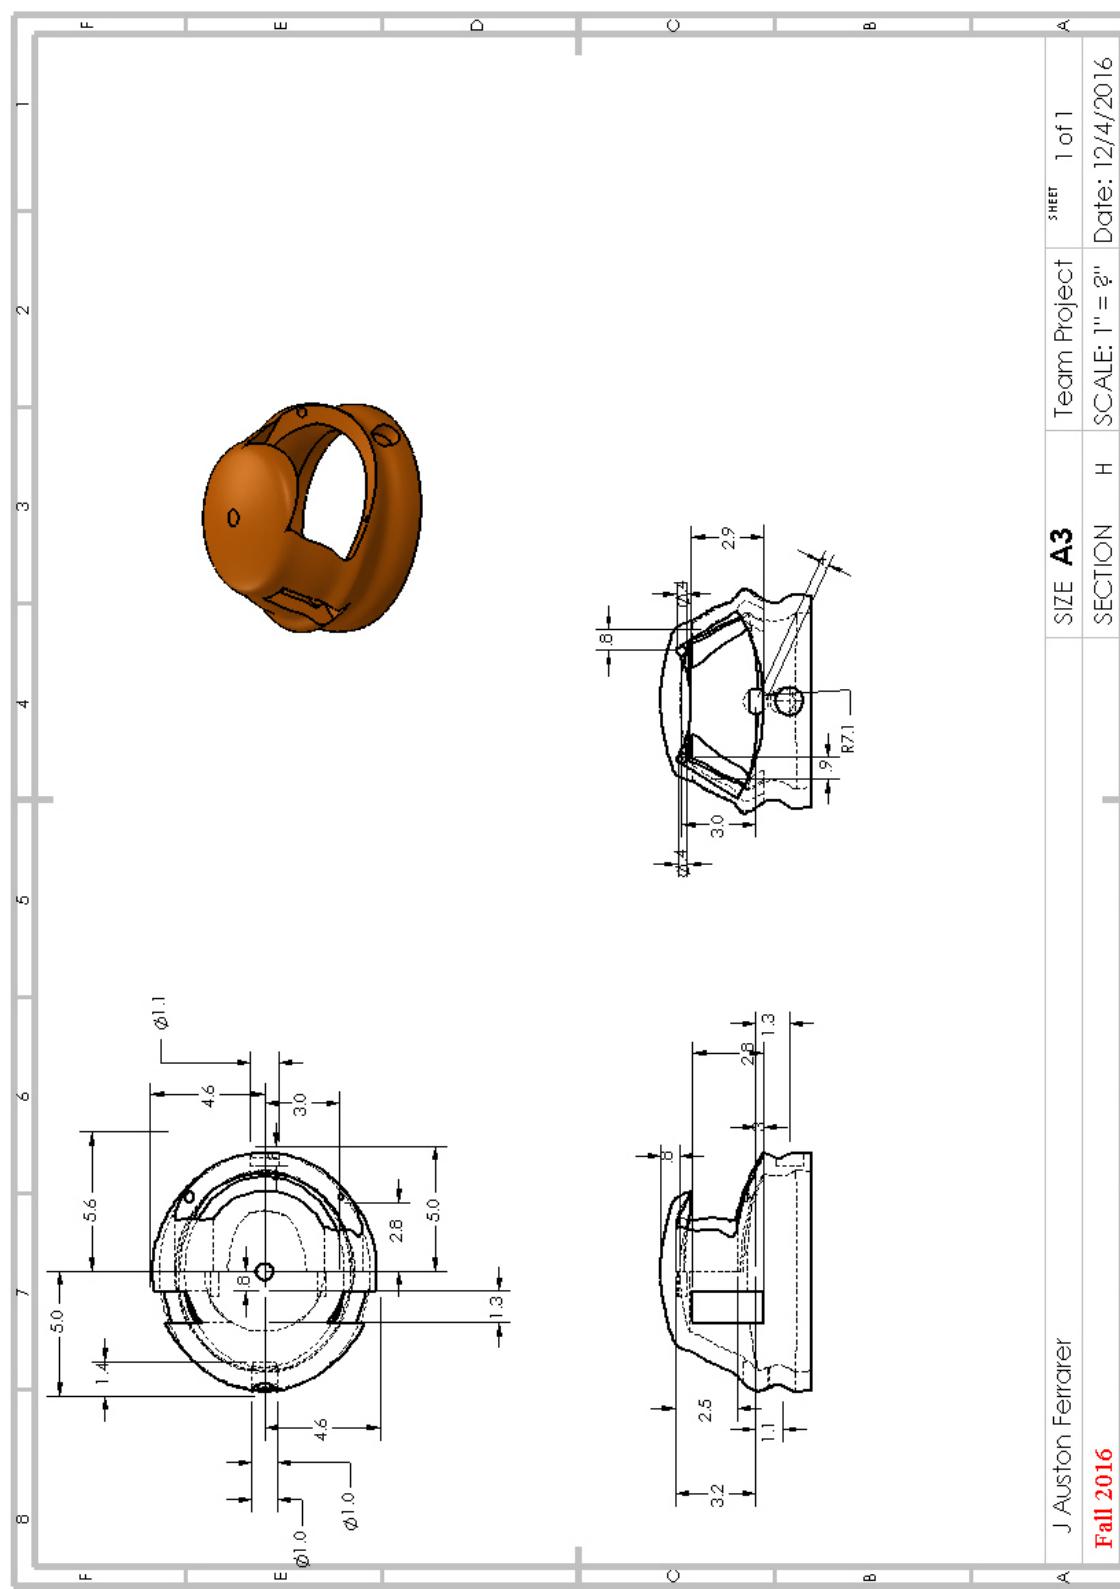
Ferrarer, Auston: Helmet Shell
